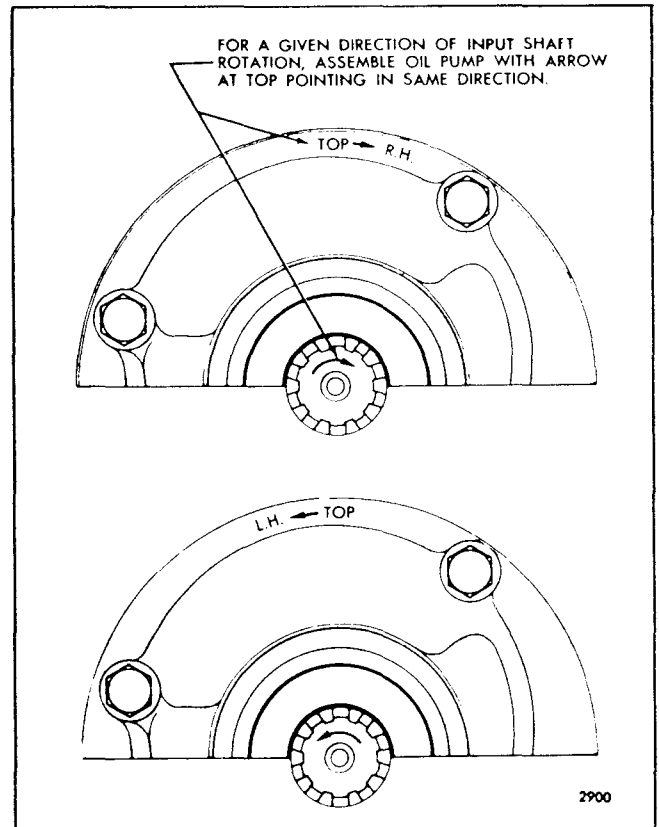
Location of Oil Pump Markings in Relationship to Input Shaft Rotation
